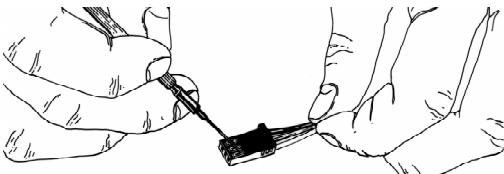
With the screwdriver, carefully lift each of the metal locking tabs to the angle shown.
